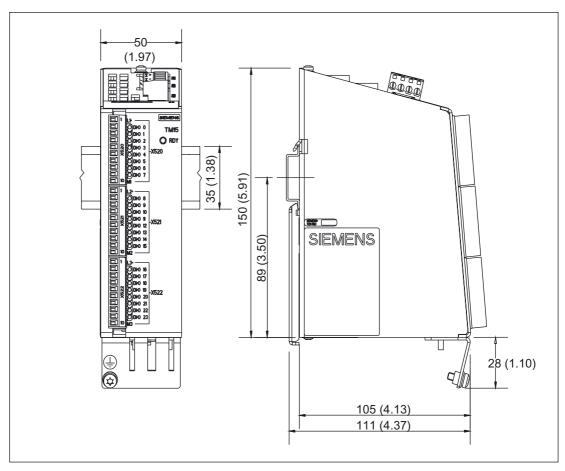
Dimension drawing of TM17 High Feature (like TM15)
